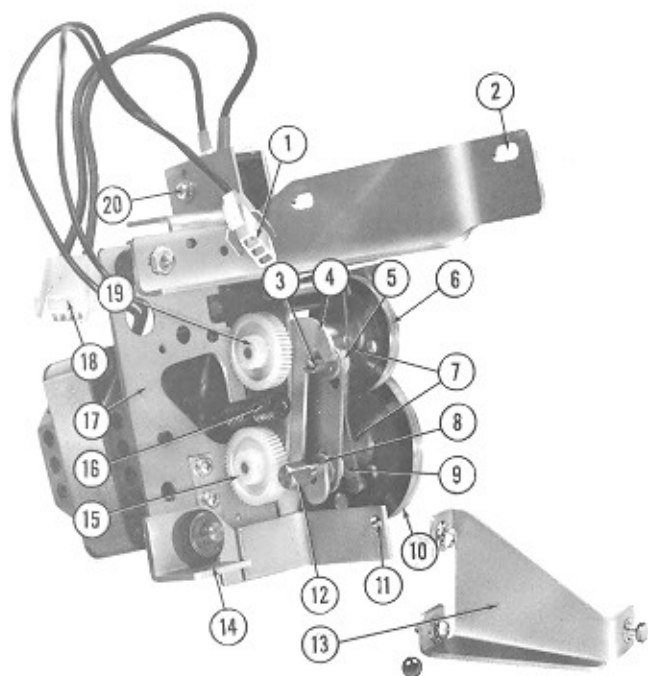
TURNTABLE MOTOR ADJUSTMENT
